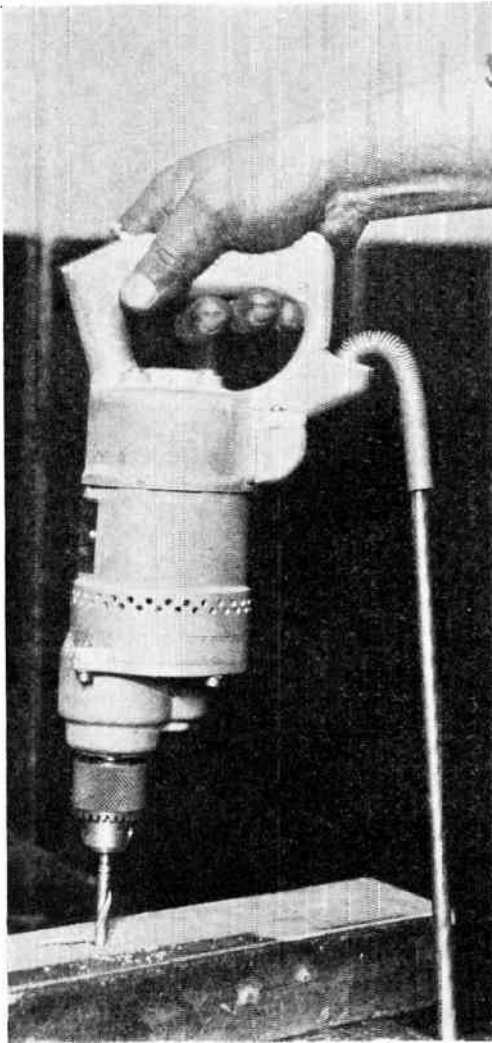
HOW NOT TO USE A DRILLING MACHINE.
